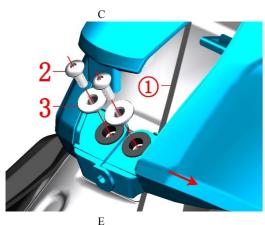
FUEL TANK COVER COMPONENT		Tank housing assembly 1 (Small fuel tank)	CHK	Q
